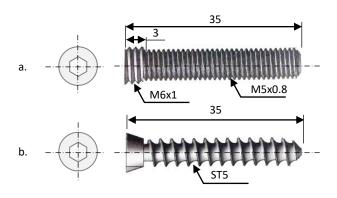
Dimensions of bone screw; (a) locking screw (b) nonlocking screw [Synthes 2002] (in mm)
